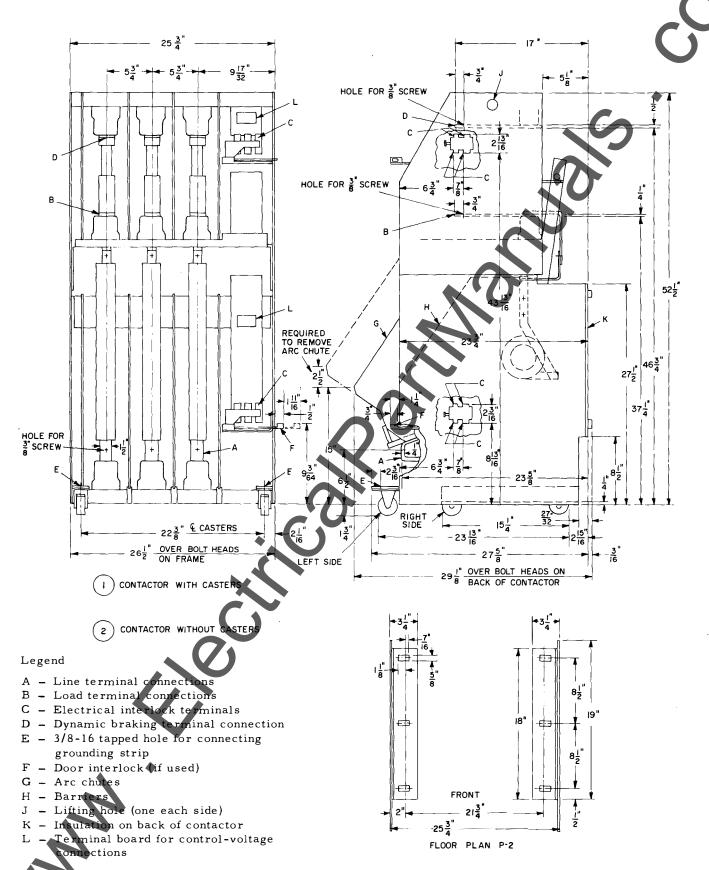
Dimensions of IC2814-X151 high-voltage contactor
